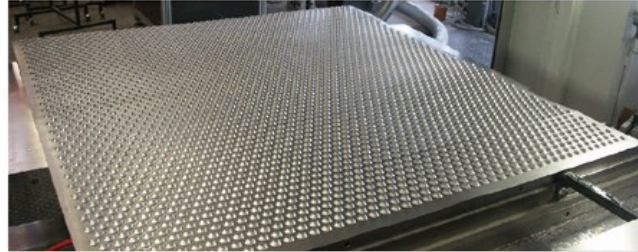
Honeycomb sheets after hydraulic deep-drawing process [82]
